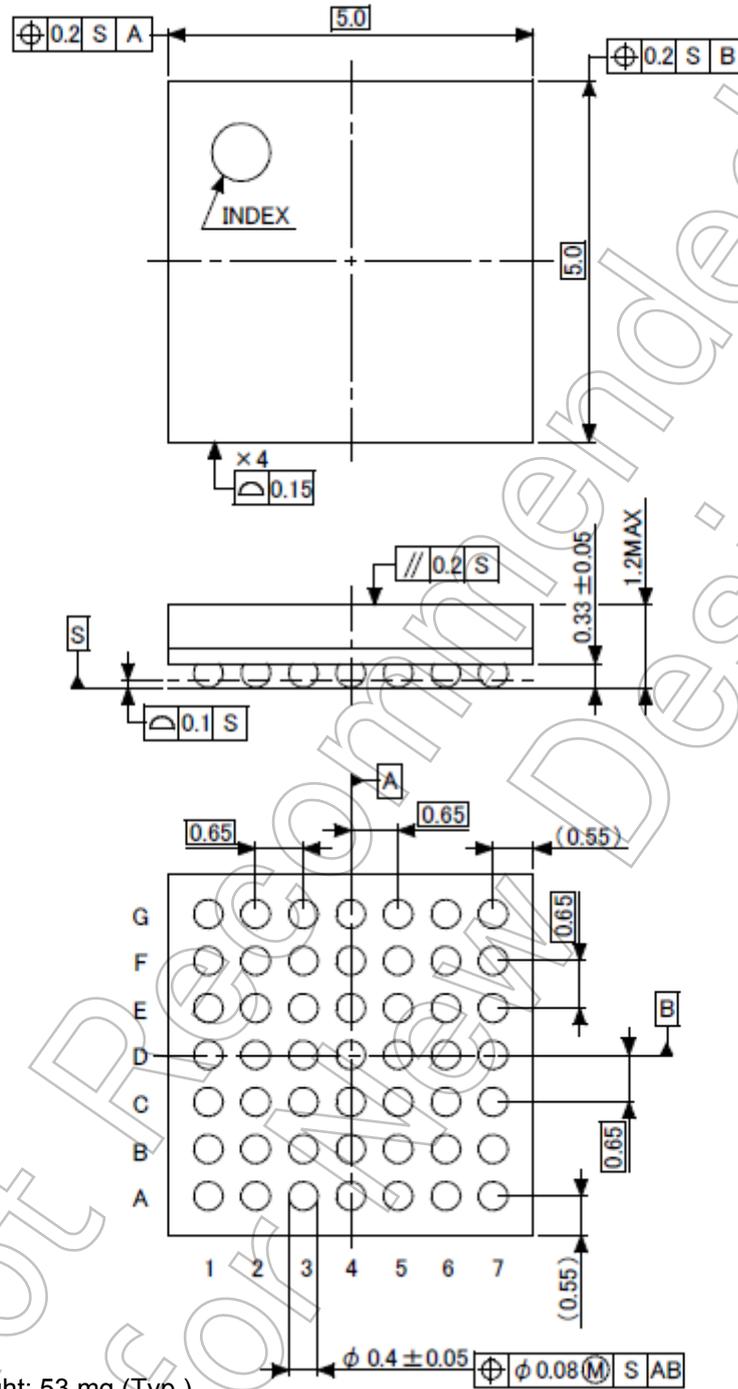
P-TFBGA49-0505-0.65AZ (TC358764XBG) Package Drawing
